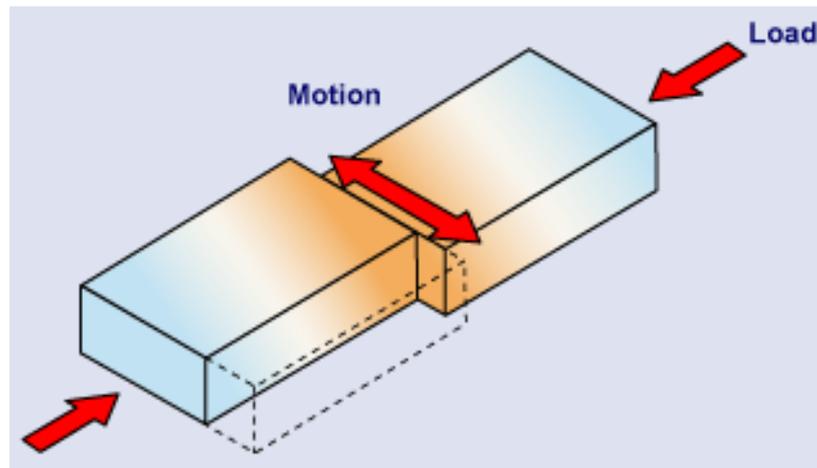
Working principle of ultrasonic welding (Typesofwelding 2018).
